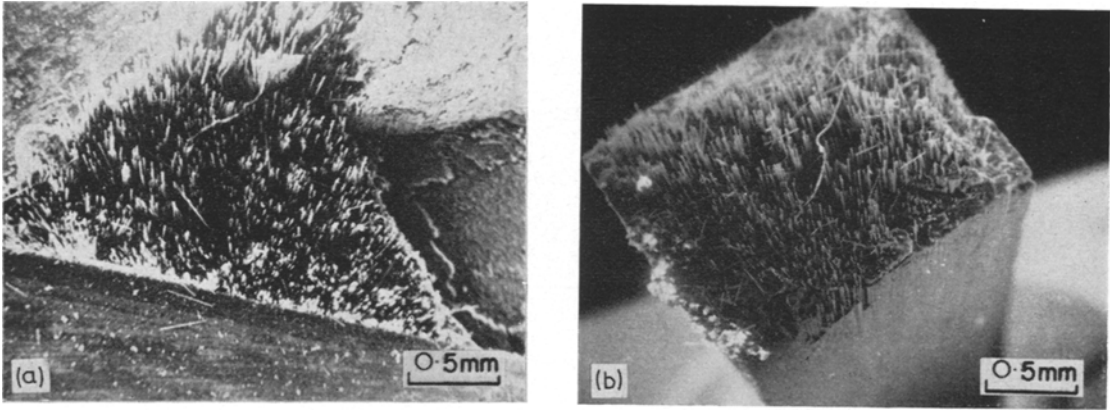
Low magnification Stereoscan photographs of fractures in (a) triangular-notched bend specimen and (b) tensile test specimen of carbon fibre composites.
